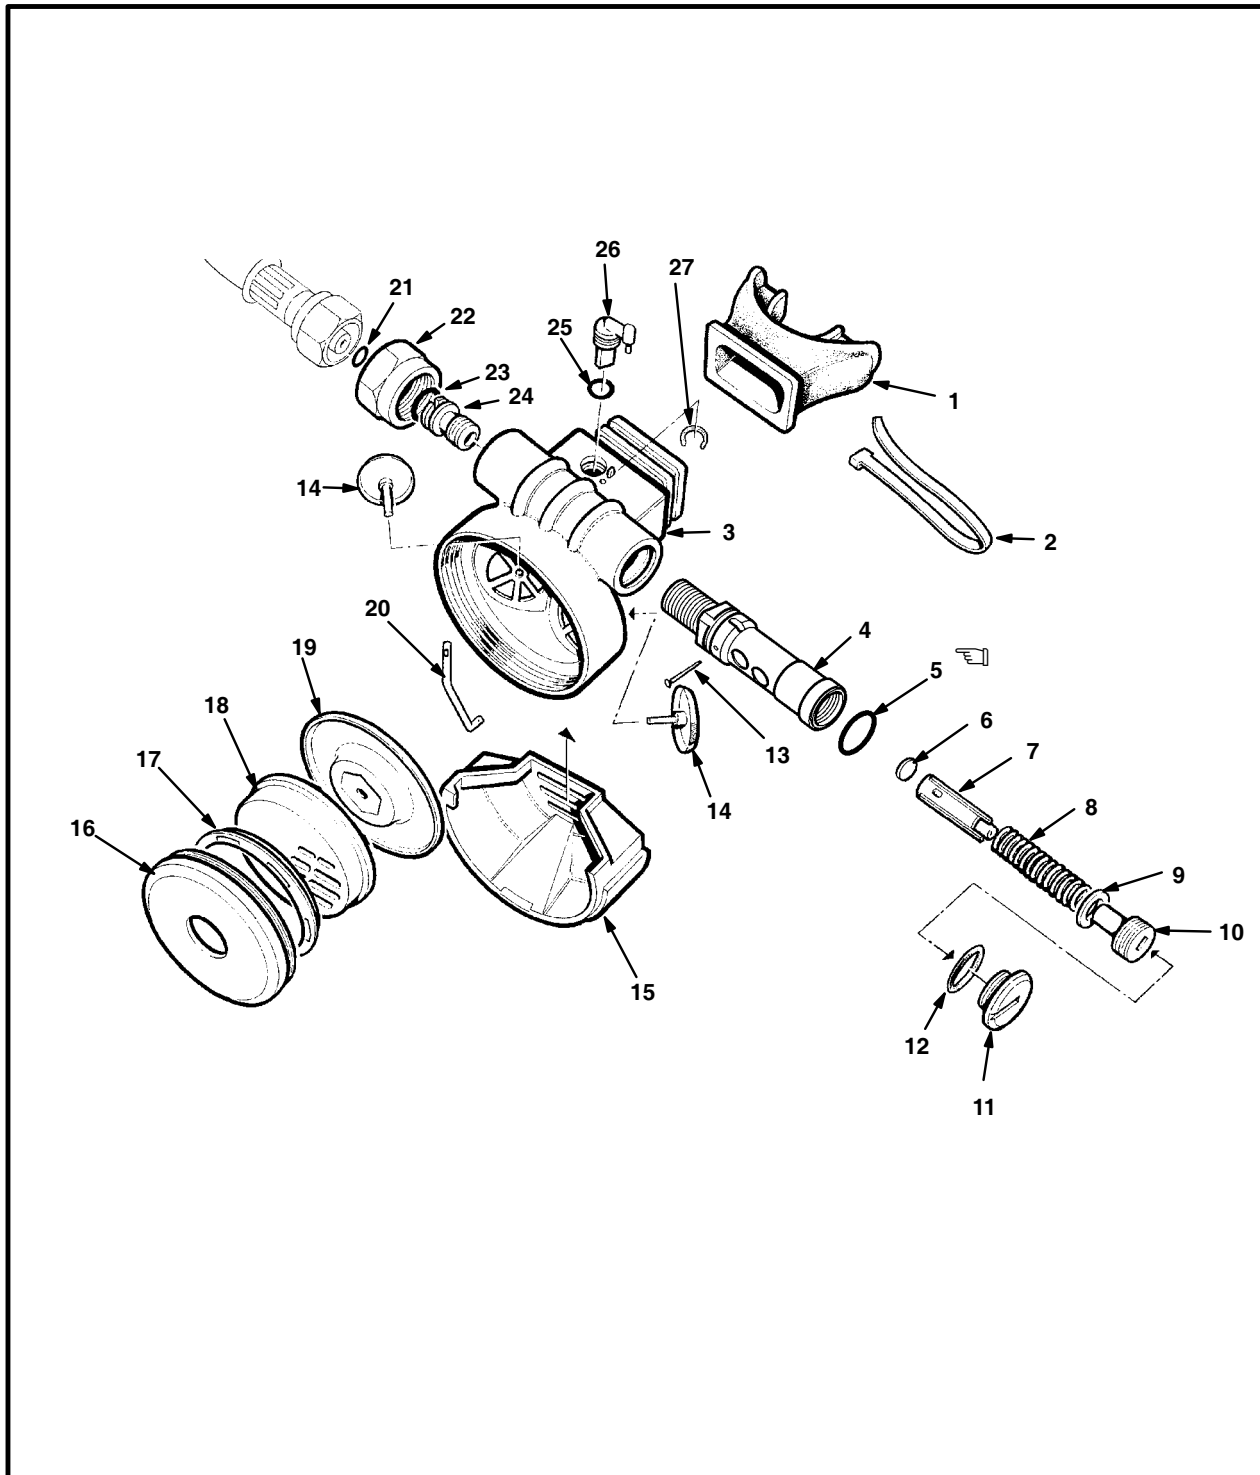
(Sheet 1 of 2) Second Stage Regulator Assembly
